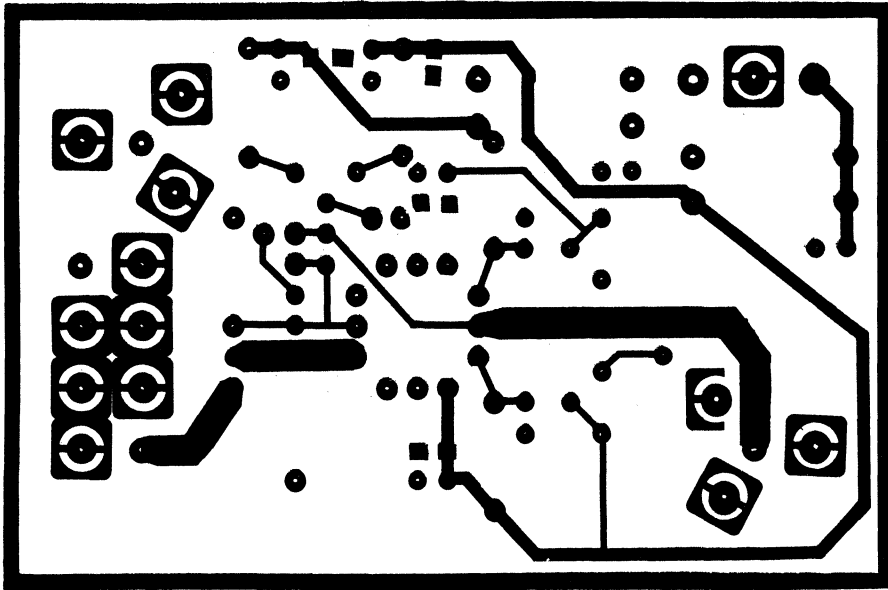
EB102 BUFFER BOARD LAYOUT AND COMPONENT POSITION
